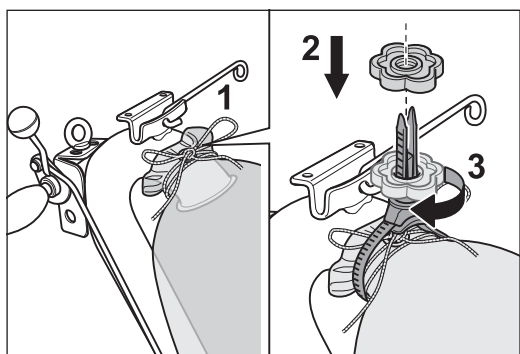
Mount the dust bag without creasing using the cord (1) and the MultiClip (2 and 3).
